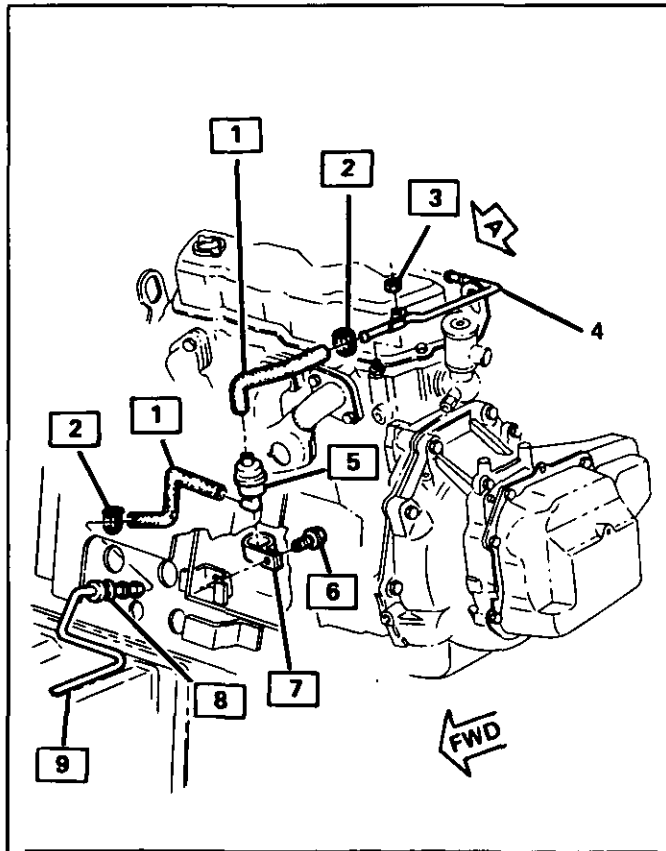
Power Brake Vacuum Filter, Tube & Hose, V-6 Engine
